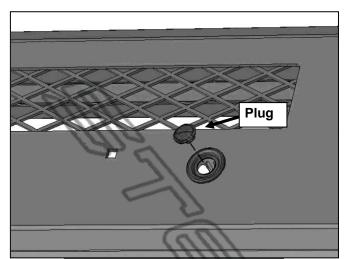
Attach Frame Bracket to driver /left side of frame. Insert 12mm Bolt Plate down through hole in bottom of the frame
